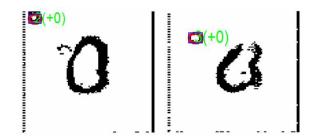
Examples of tracked spatters in laser welding scenario.
